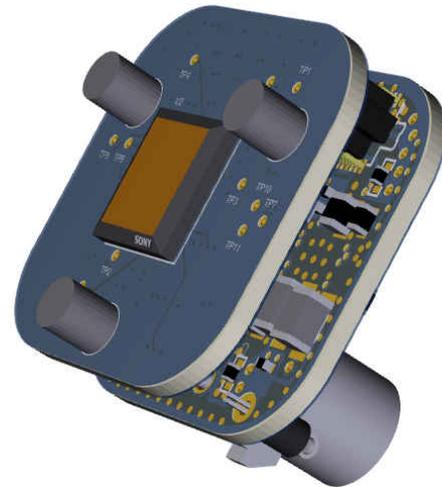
3-D PCB Assembled Boards (Angled View)
